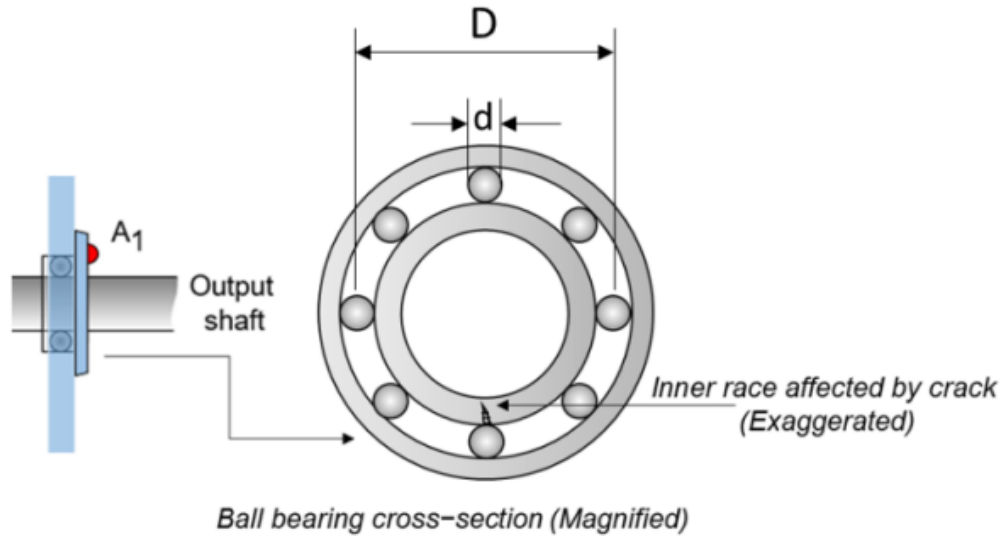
An image of Ball bearing cross section with inner race defect
